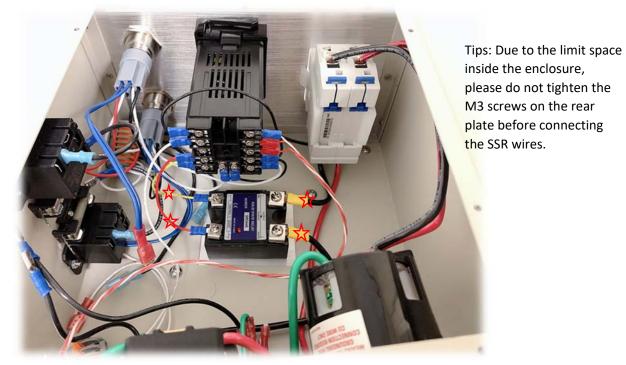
While assembling the front plate and rear plate with enclosure body, finish the SSR wiring.
